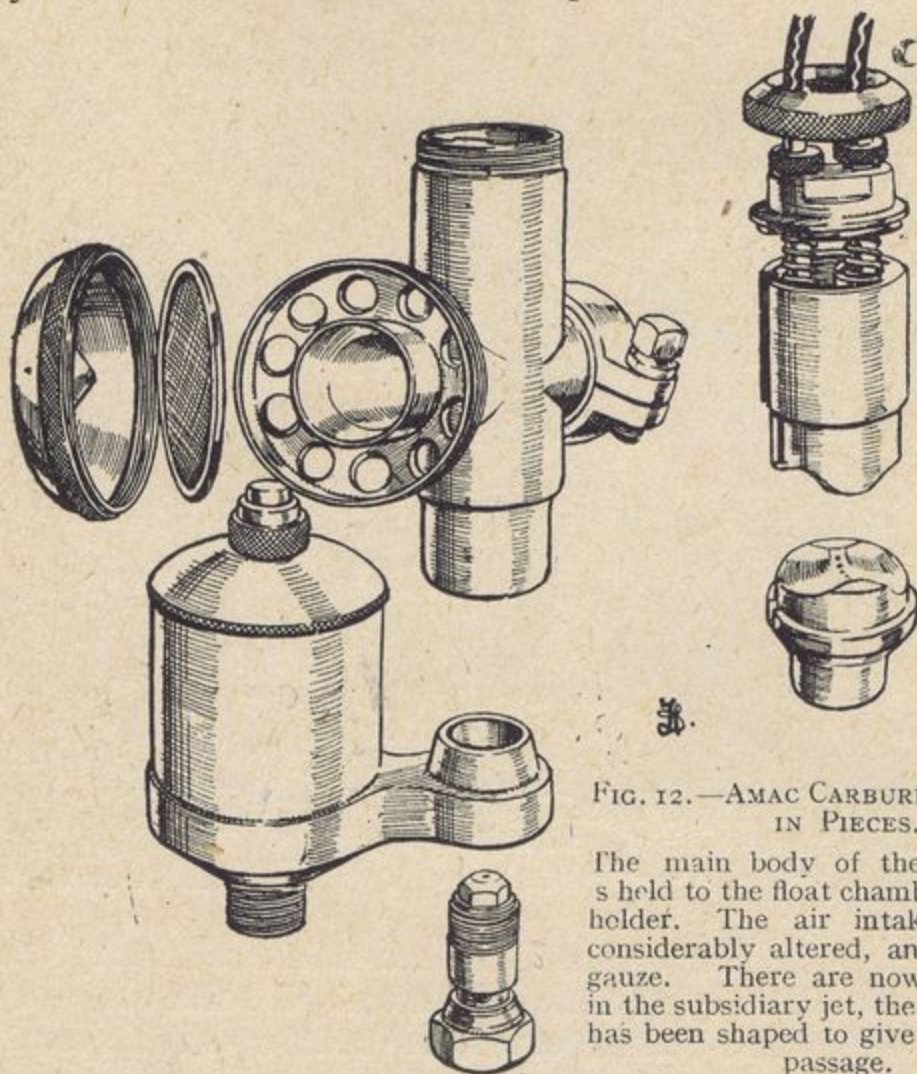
AMAC CARBURETTER SHOWN IN PIECES.
